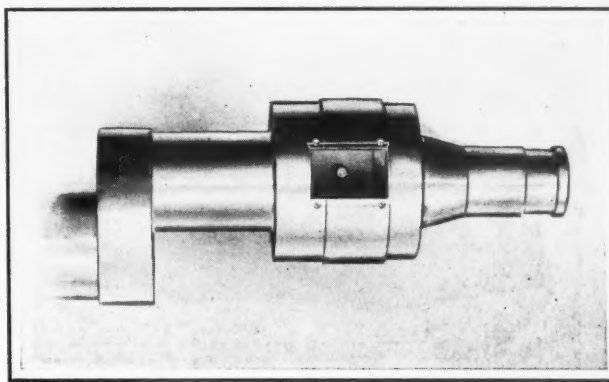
Pocket provided in the Crankshaft Hub for the Clutch Pin
